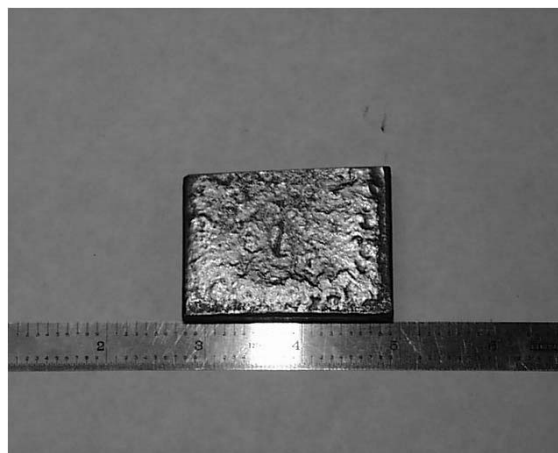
Visual appearance of a D2 tool steel sample with an HDI-processed WC-Ni coating on the surface.
